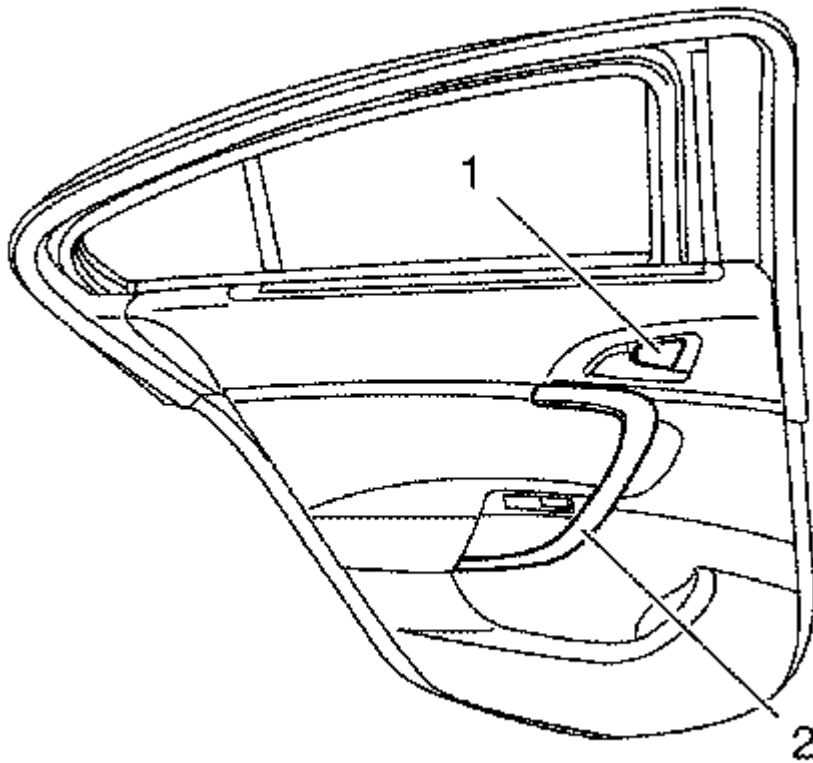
Rear Side Door Handle And Pull Handle Covers
